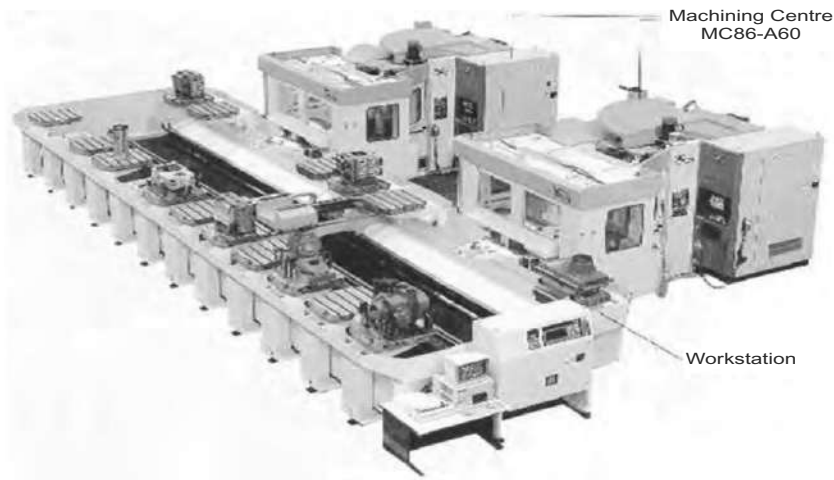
Actual flexible machining cell with two machining centers (Courtesy, Makino milling machines Co. Ltd., Tokyo, Japan)
